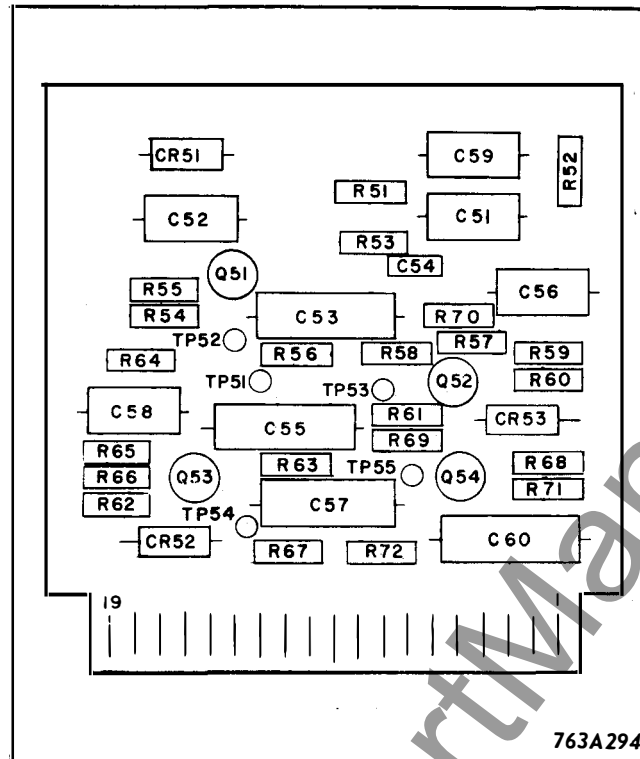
Component locations on Amplifier and limiter printed Circuit Board.
